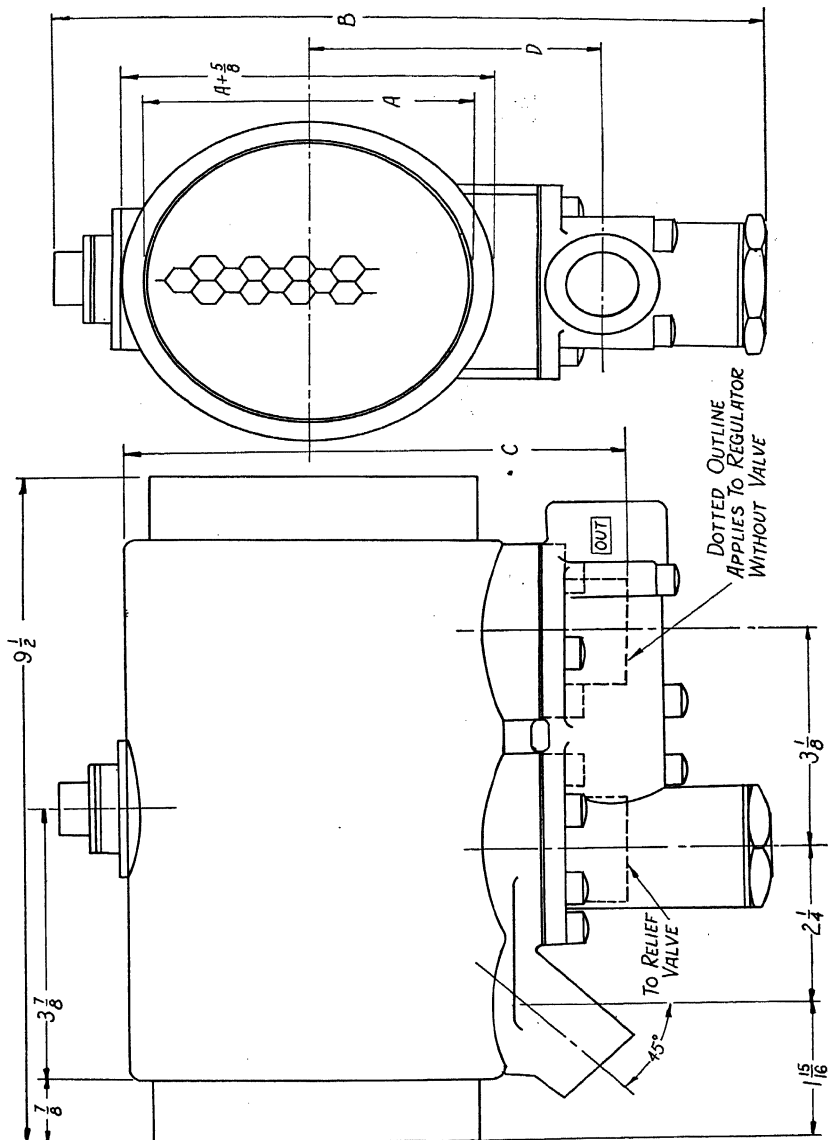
OIL COOLER MANUFACTURED BY UNITED AIRCRAFT PRODUCTS, INC.
